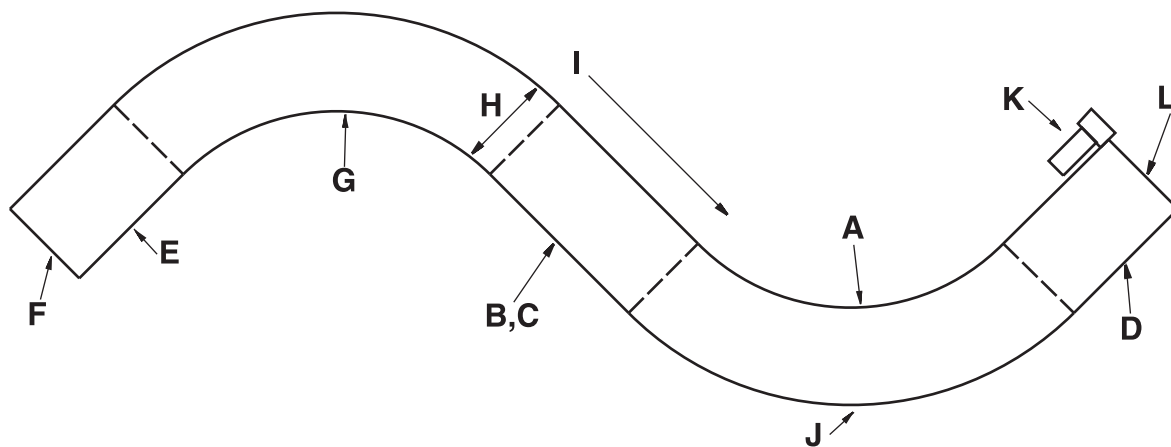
TYPICAL 2-TURN RADIUS LAYOUT
